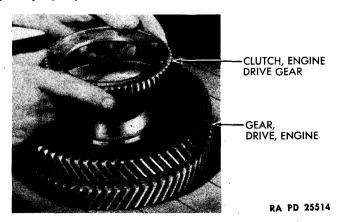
Installing Engine Drive Gear Clutch On Drive Gear
